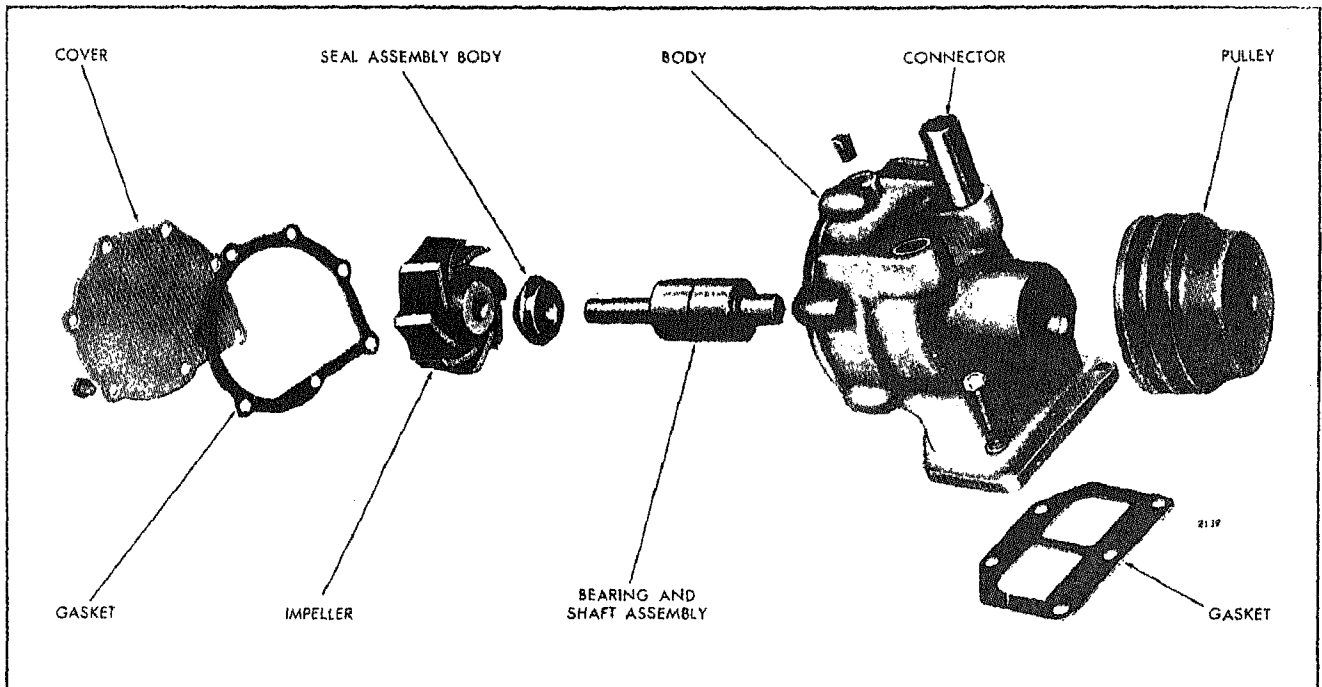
Fresh Water Pump Details and Relative Location of Parts
